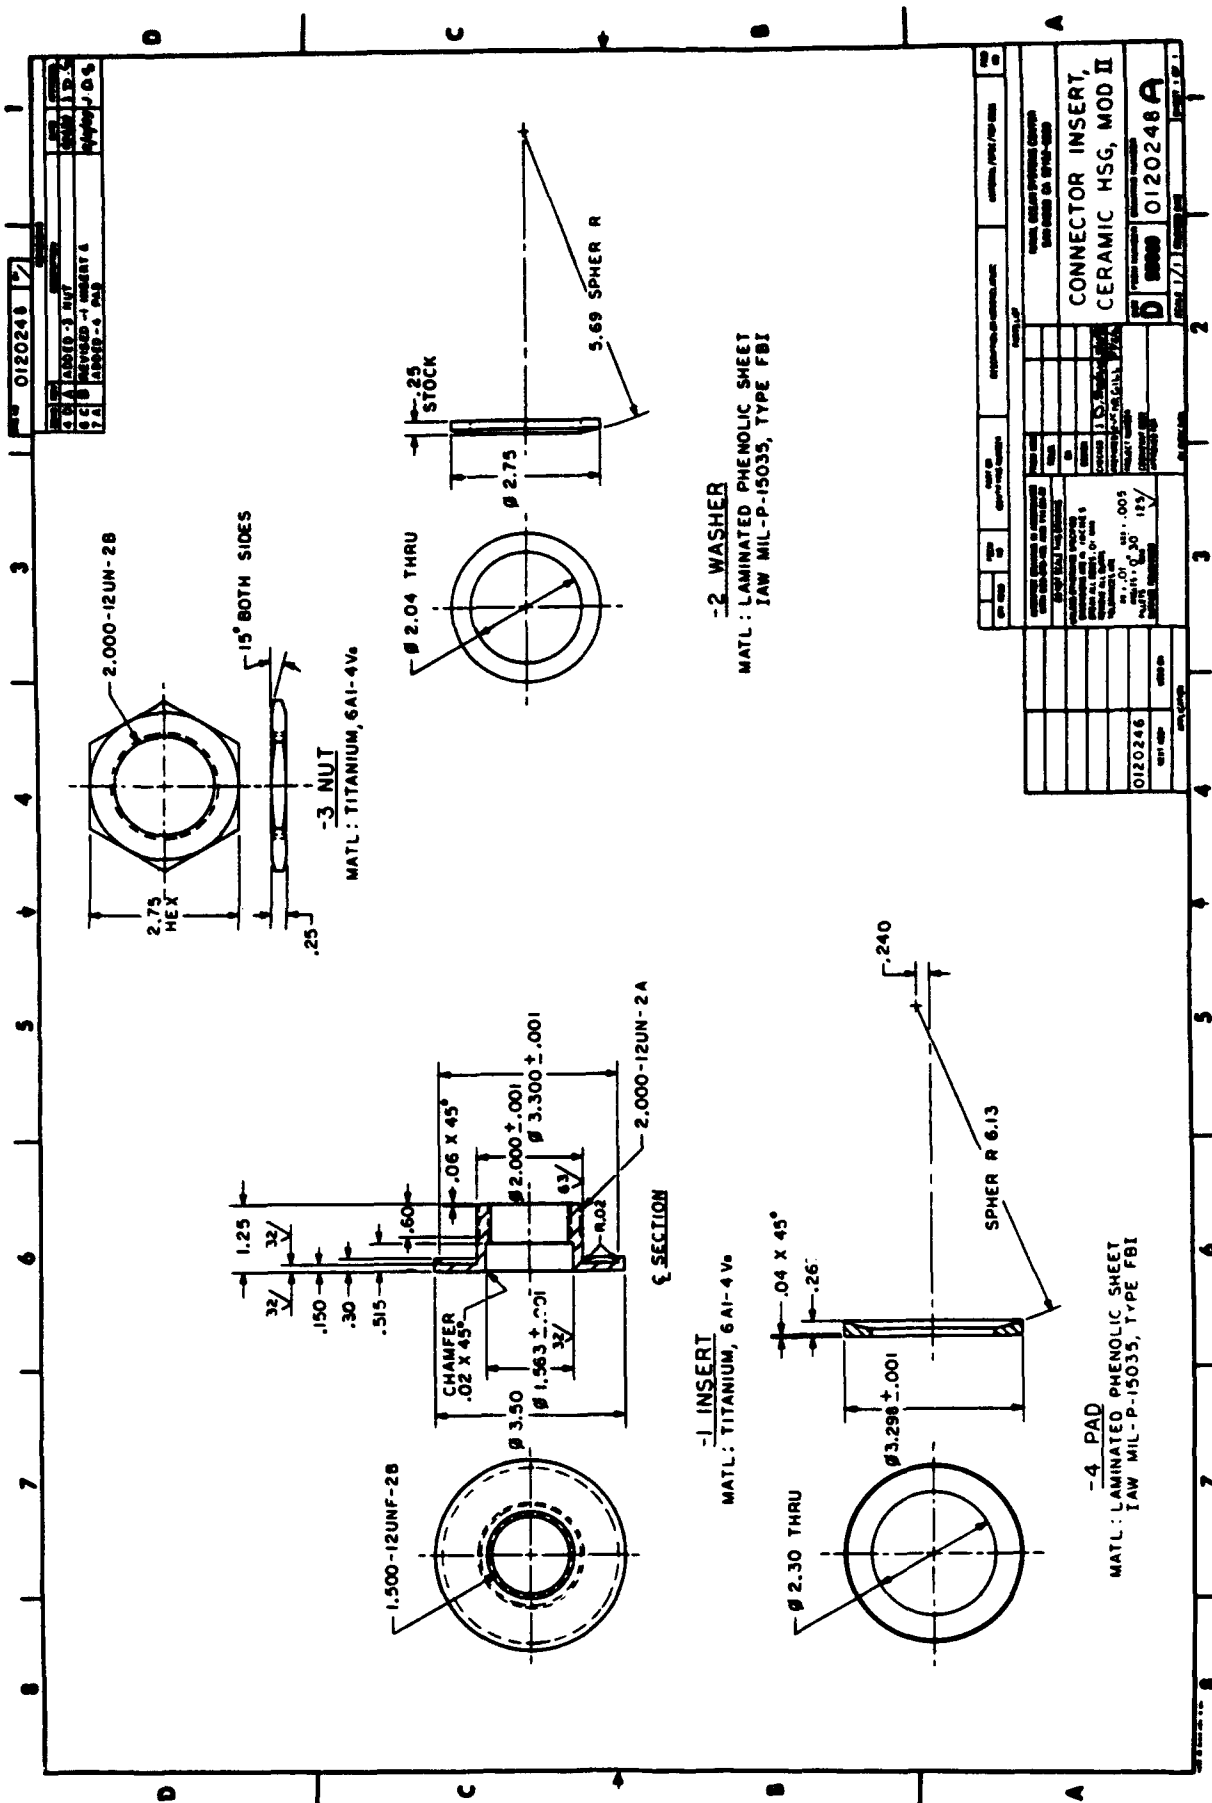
Improved connector Insert (Revision A for Mod 2 hemisphere) after incorporation of phenolic bearing pad.
